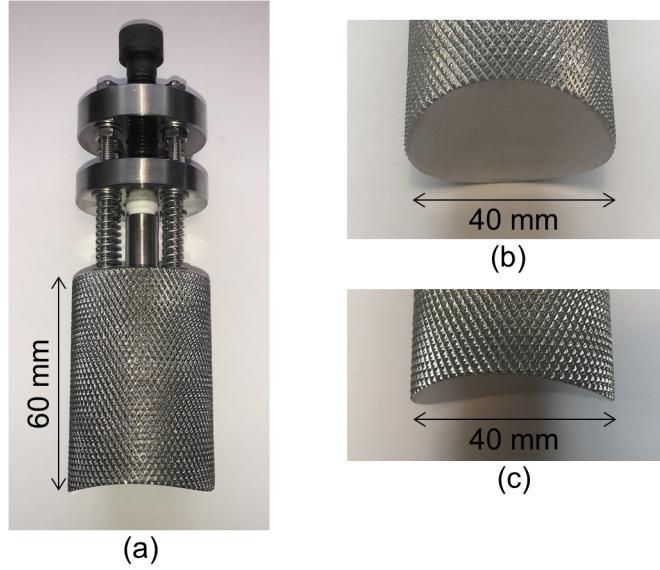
Photographs of Tx3 transducer assembly design which has a 40 mm diameter knurled curved end waveguide: (a) side view, (b) waveguide end view, and (c) waveguide end curved profile view.
